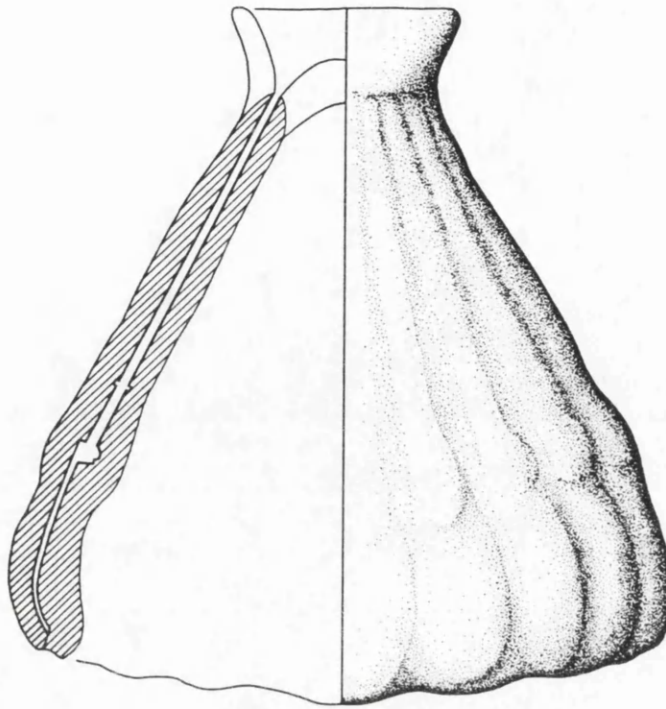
Reconstruction drawing of a mould assembly from Castleford in which two-piece spoon moulds were luted together and about 16 spoons cast at one time. Scale 1:2 (drawing by Margaret Mahoney, English Heritage)
